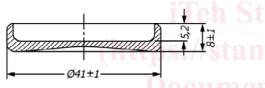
Glass Dish (sample container) NOTE 1—All dimensions are in millimetres.
